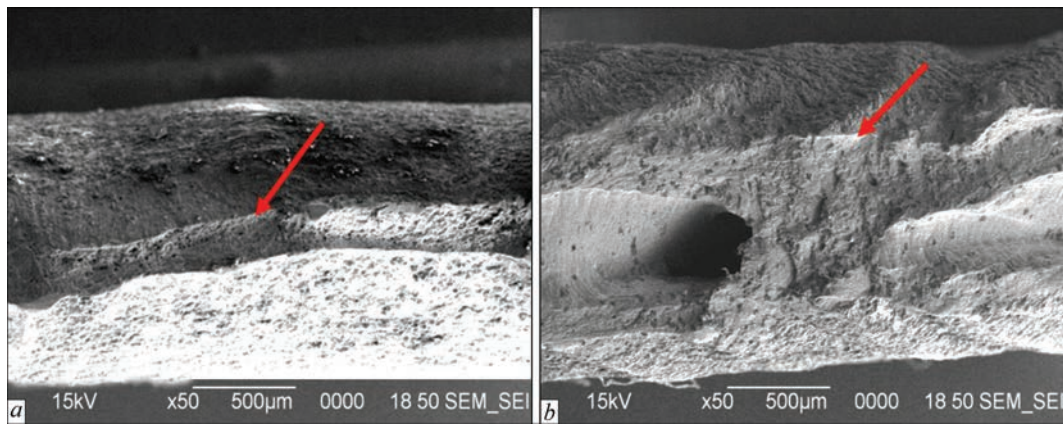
Fracture surface of the tested tensile specimen: *a* — Z-BRP45; *b* — XY-BRP90 displaying a ductile fracture profile
